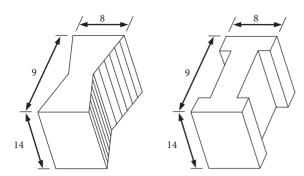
Configuration and dimensions (mm) of dovetail keys (left: butterfly key, right: H-shaped key).
